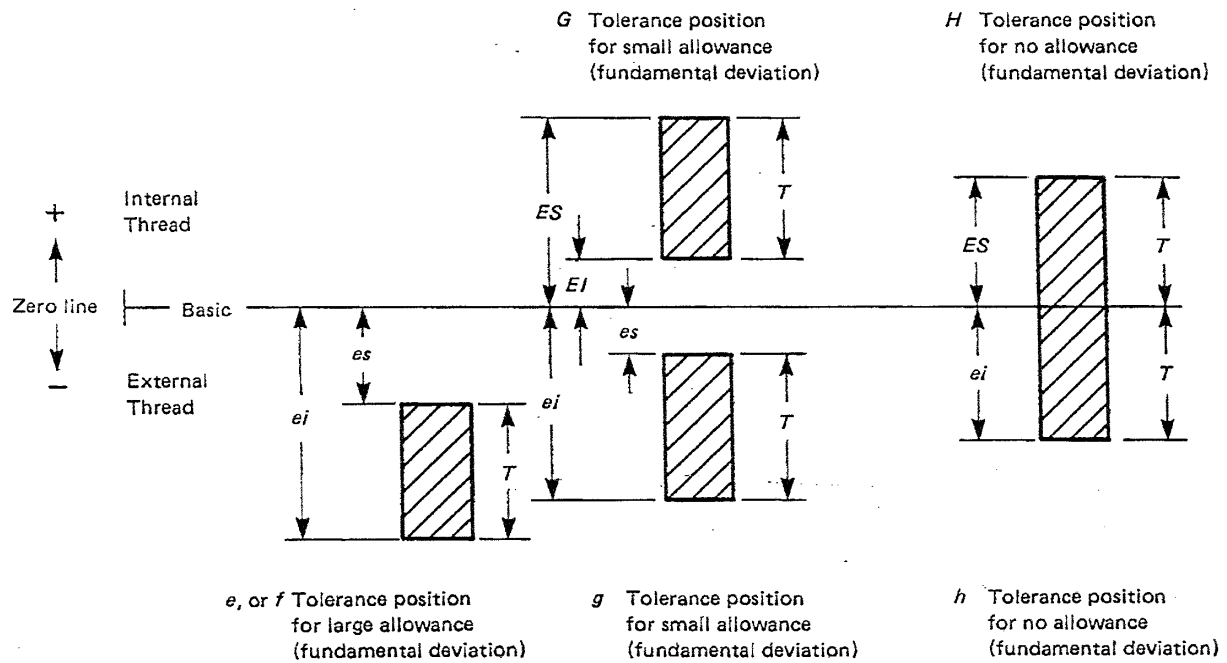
METRIC TOLERANCE SYSTEM FOR SCREW THREADS
